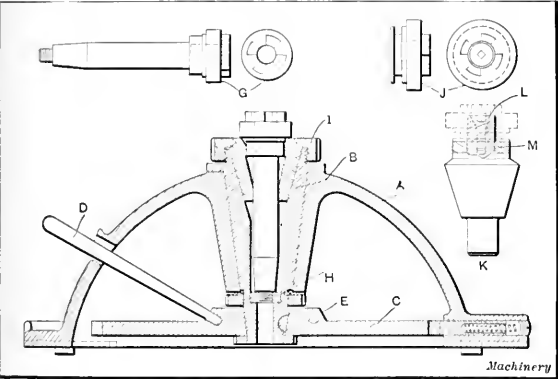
Cross-sectional View of Fixture for milling Clutches and Details of Work-holding Mandrels
